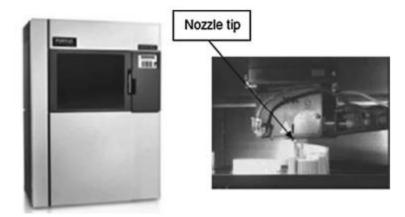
Typical Stratasys machine showing the outside and the extrusion head inside (courtesy of Stratasys)
